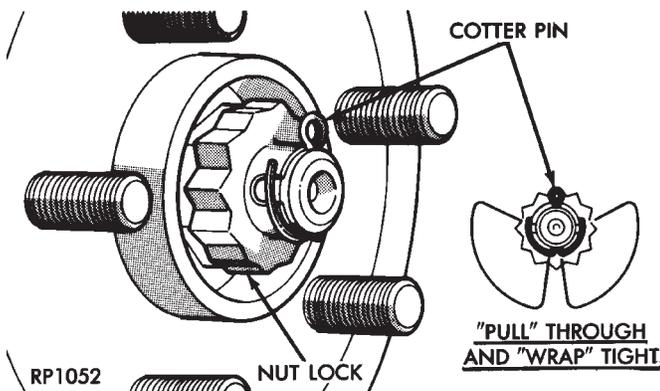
Install Spring Washer, Nut Lock, & Cotter Pin
